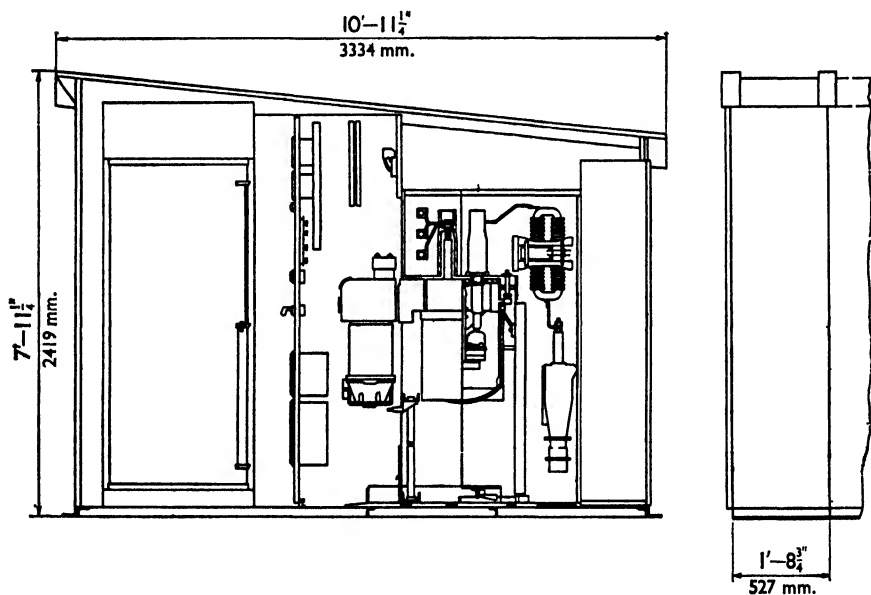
Sectional view of packaged substation 13.8 kV 500 MVA of the "aisle" type (South Wales Switchgear Ltd.).
